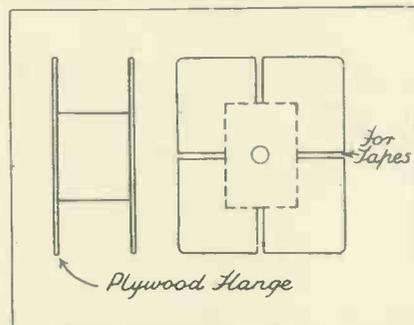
The formers should be made like this, with places for tapes so that the windings can be fixed.
